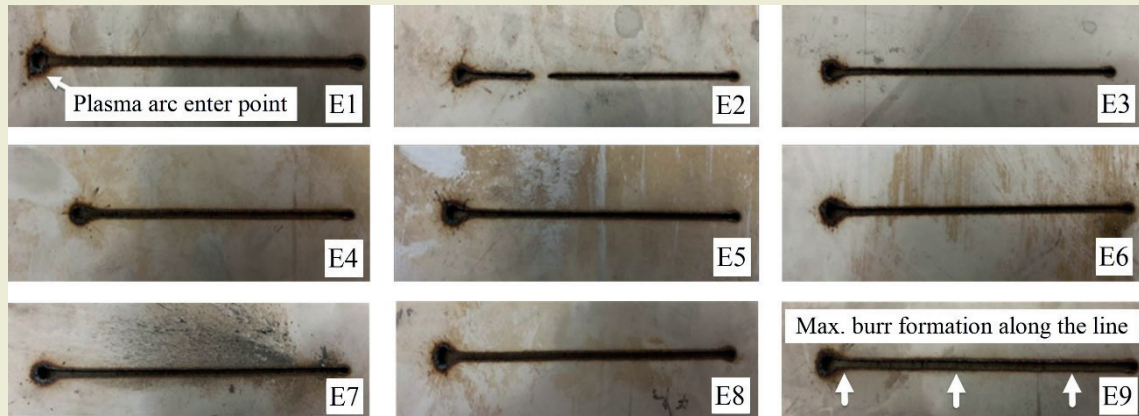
Bottom surface burr formation after cutting on a 4 mm thick plate
